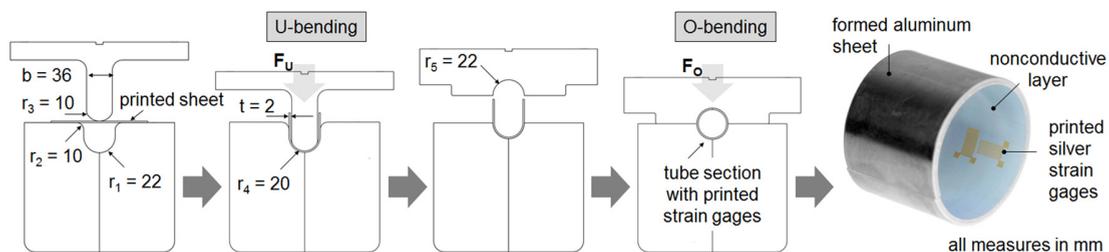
Forming process for the manufacturing of printed tube sections with strain gages on the inner or outer surface [17, modified].
